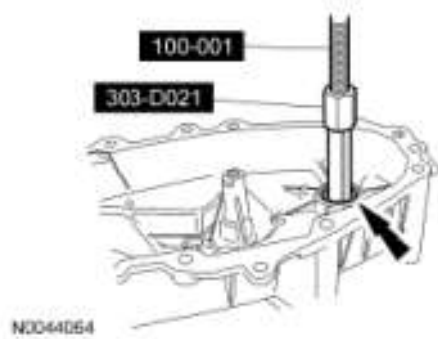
Removing Needle Bearing Using Collet With Slide Hammer
